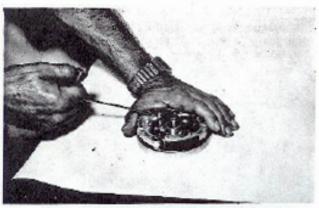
Using a hooked tool, remove the retaining springs from the clutch engaging arms
